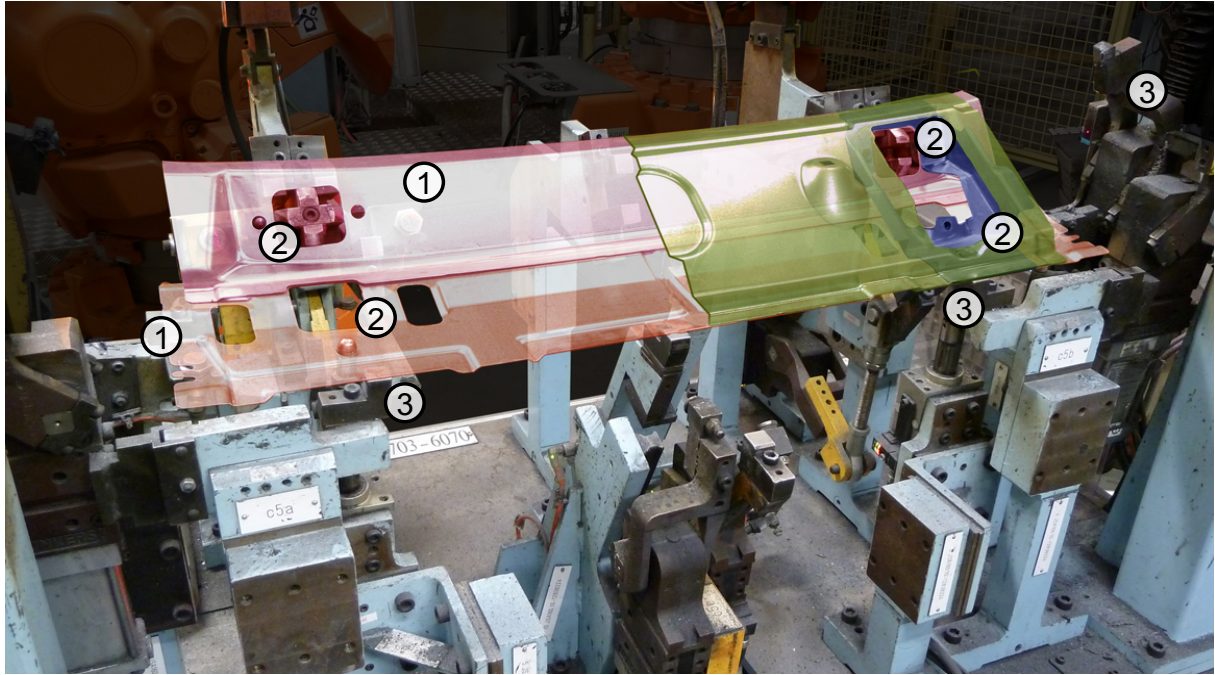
The fixture with the sheet metal parts in place: (1) magnetic detectors, (2) positioning pins, (3) clamps and clamping supports (Paper A).
